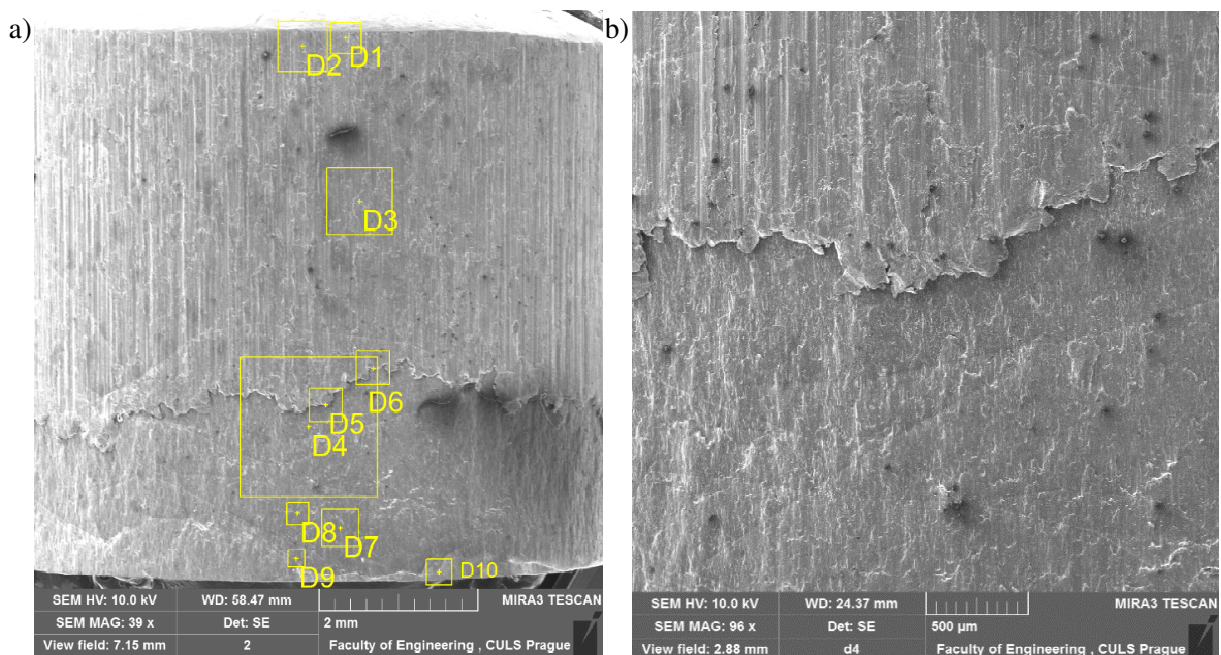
Burnish and fracture surfaces: a – full view, b – detail D4
